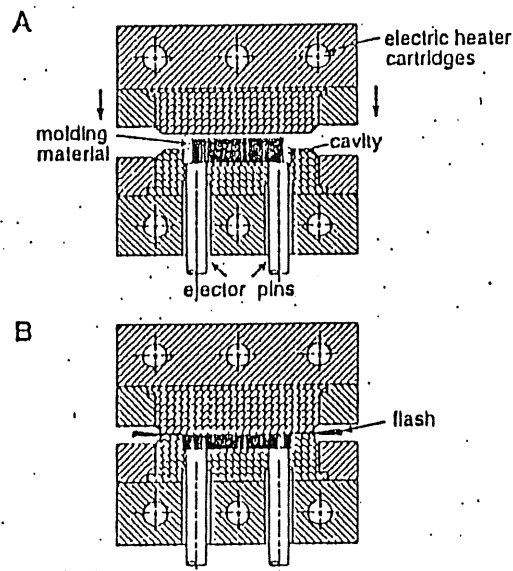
Compression-molding process. A. View of an open mold with molding material in place. B. Closed mold showing formed part and flash formed from excess resin. (Adapted from J. L. Hull, in the *Concise Encyclopedia of Polymer Science and Engineering*, J. I. Kroschwitz, ed. Copyright © 1990 by John Wiley & Sons. Reprinted by permission of John Wiley & Sons, Inc.)
